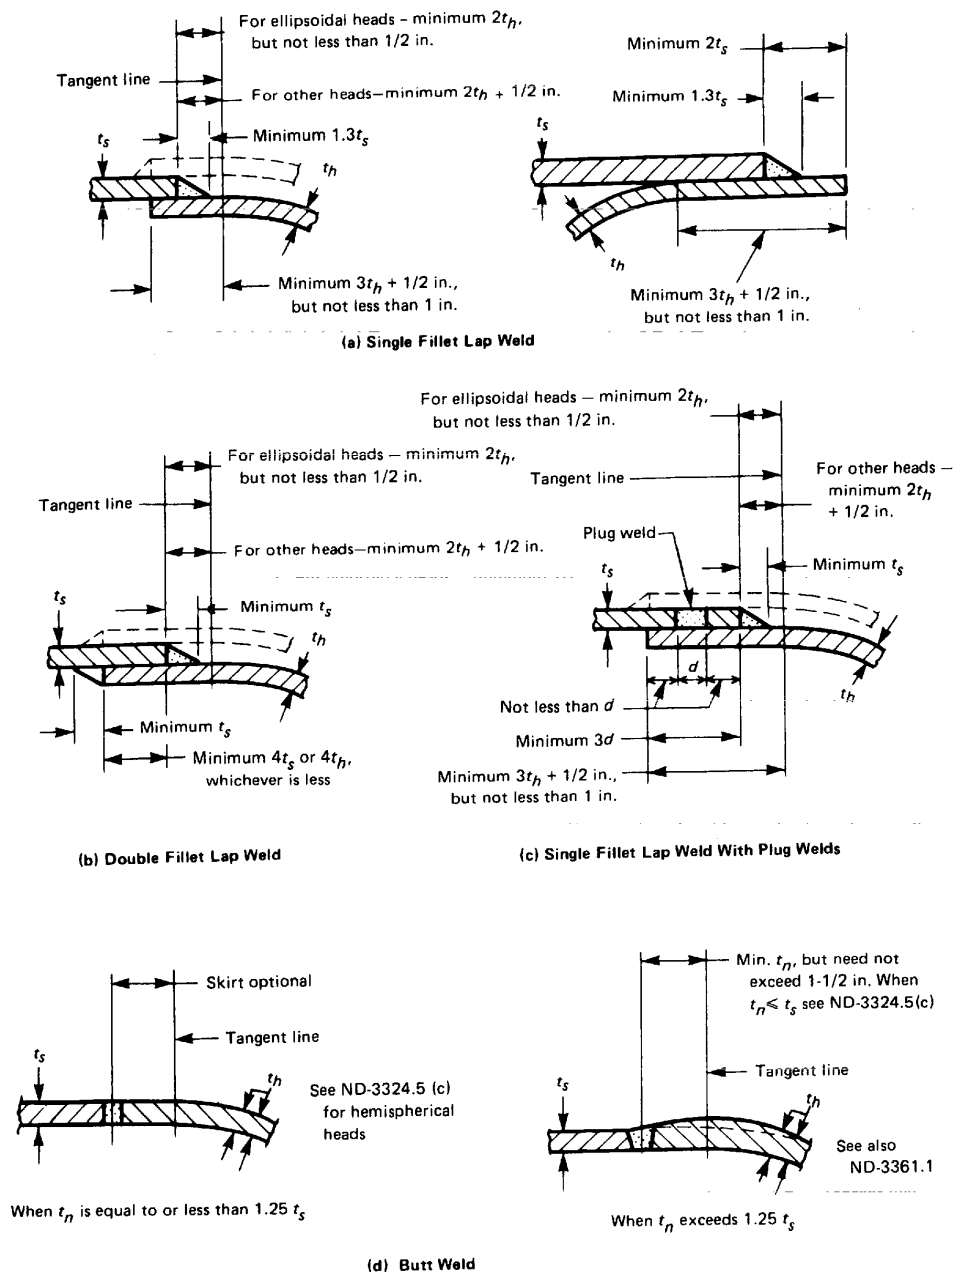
ATTACHMENT WELDS
